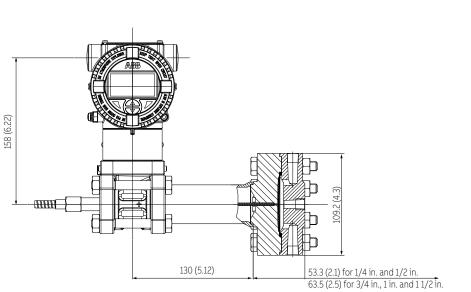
266HRH / 266NRH with barrel housing and direct mount seal S26TT off-line threaded flange
